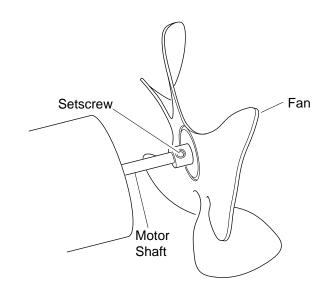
Fan, Motor Shaft, and Setscrew Location
